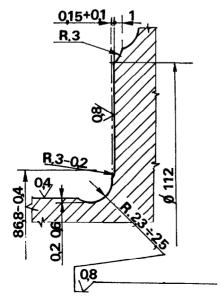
DETAILS OF CRANKSHAFT MAIN JOURNALS AND CRANKPINS
